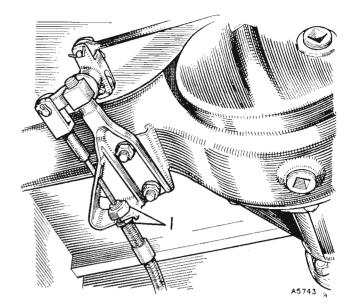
Shows location of hand brake cable adjustment (1) on the rear axle
